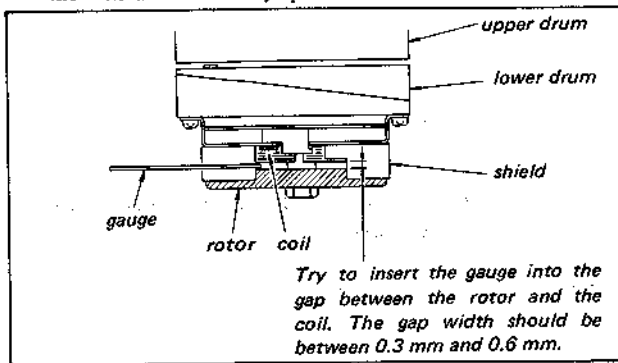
Checking the motor gap width after replacing the drum assembly
